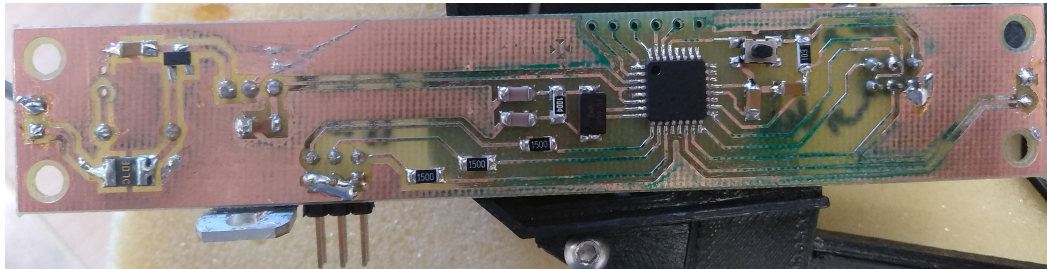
The stimulator circuit implemented on a $120\text{ mm} \times 21\text{ mm}$ PCB
